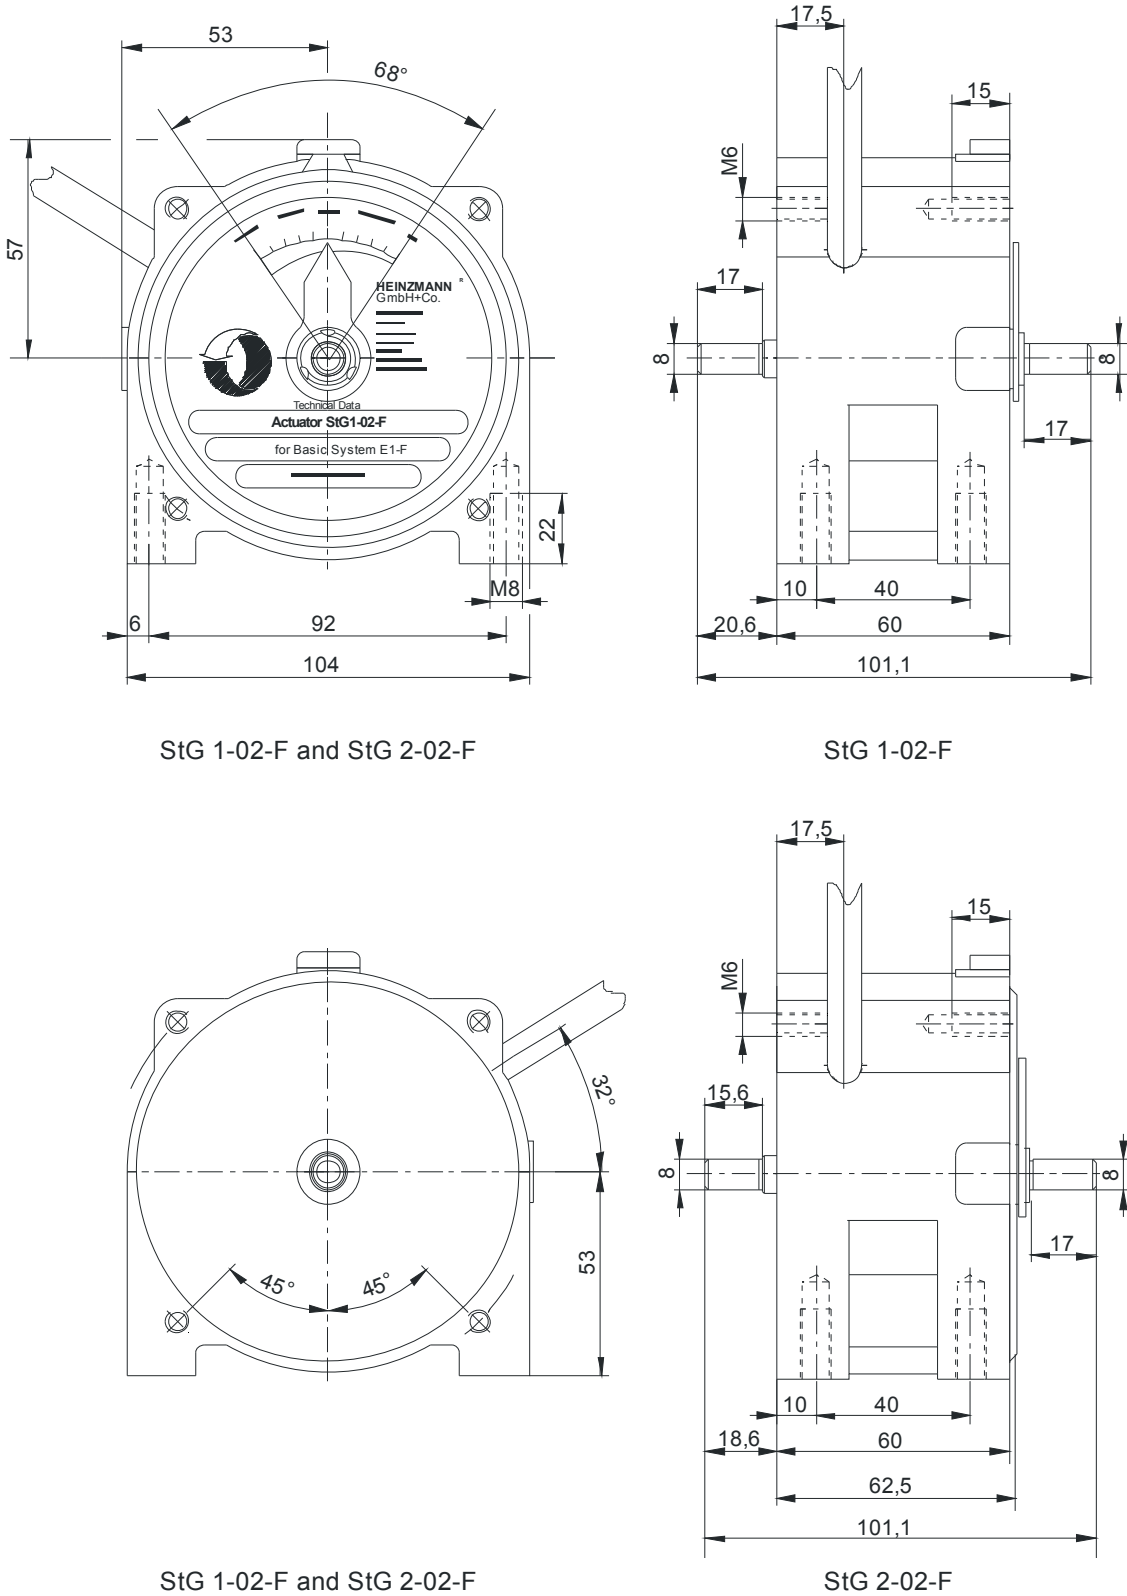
Dimensions of StG 1-02-F and StG 2-02-F
